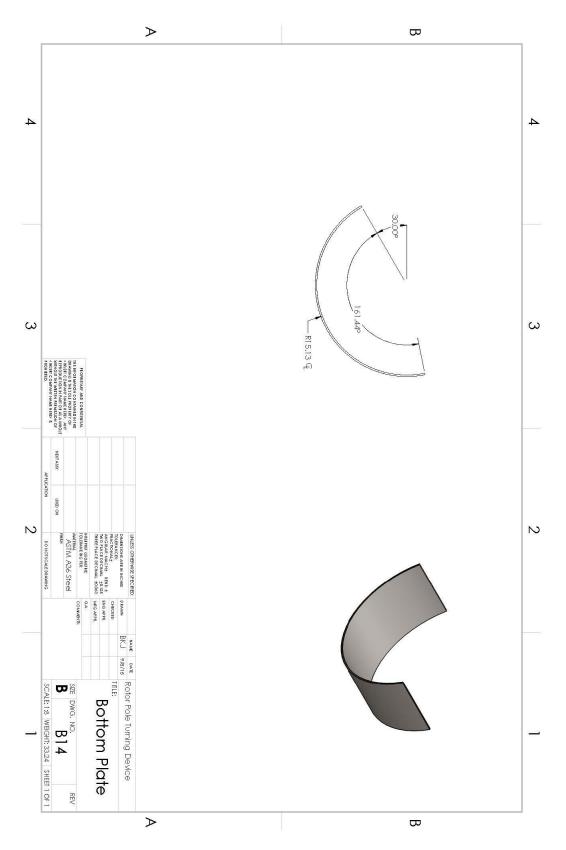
DRAWING OF TURNING DEVICE BOTTOM PLATE
